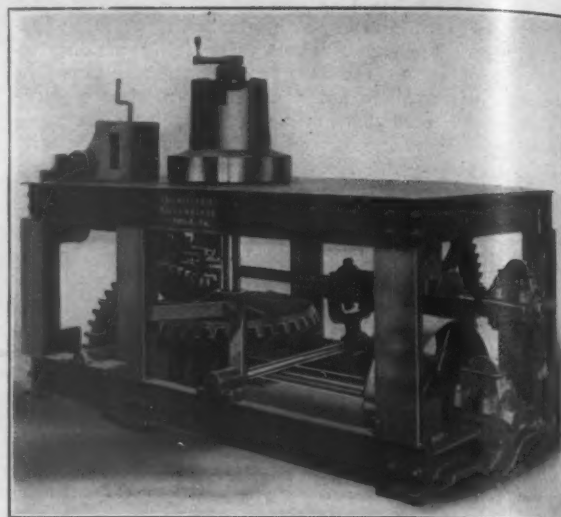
Wire Drawing Machine Built by Philadelphia Roll & Machine Company.
